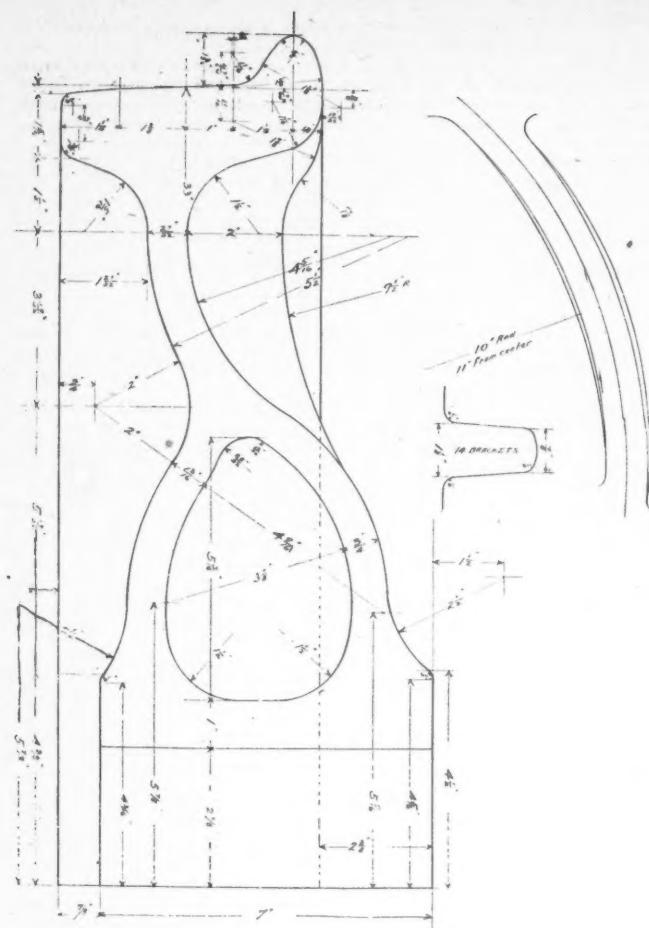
33 IN. 690-LB. CAST IRON WHEEL FOR 60,000-LB. CARS.
